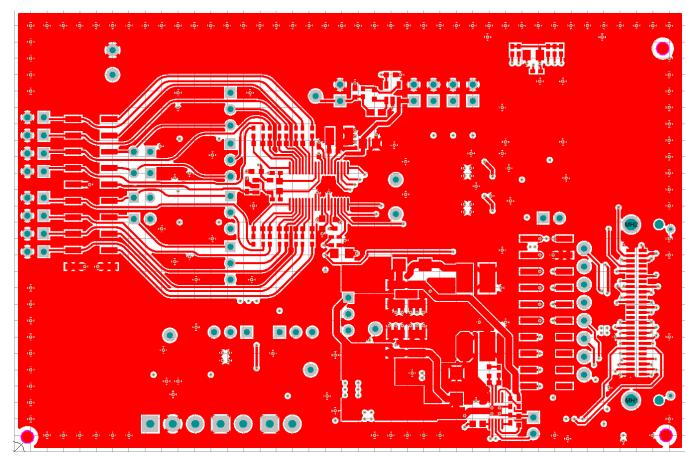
ADS8688EVM PCB: Top Layer (L1)
